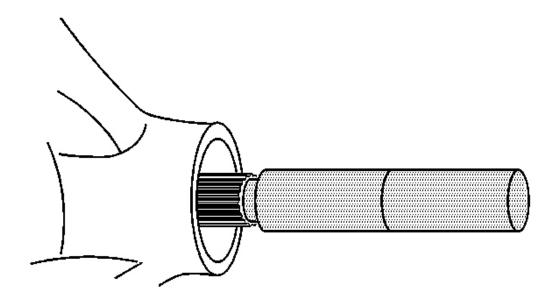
Installing J 22536 Or J 44421 On Pinion Courtesy of GENERAL MOTORS CORP.
